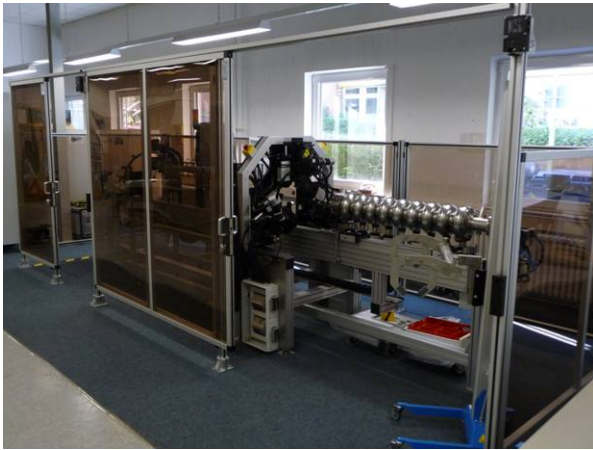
Entire Cavity Tuning machine with the machine housing. The door at the cavity insert position is open.
